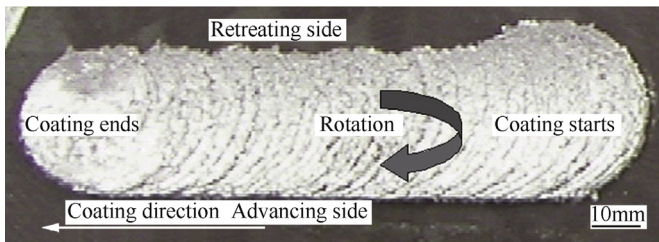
Typical friction surfaced AA6063 Aluminium alloy.
